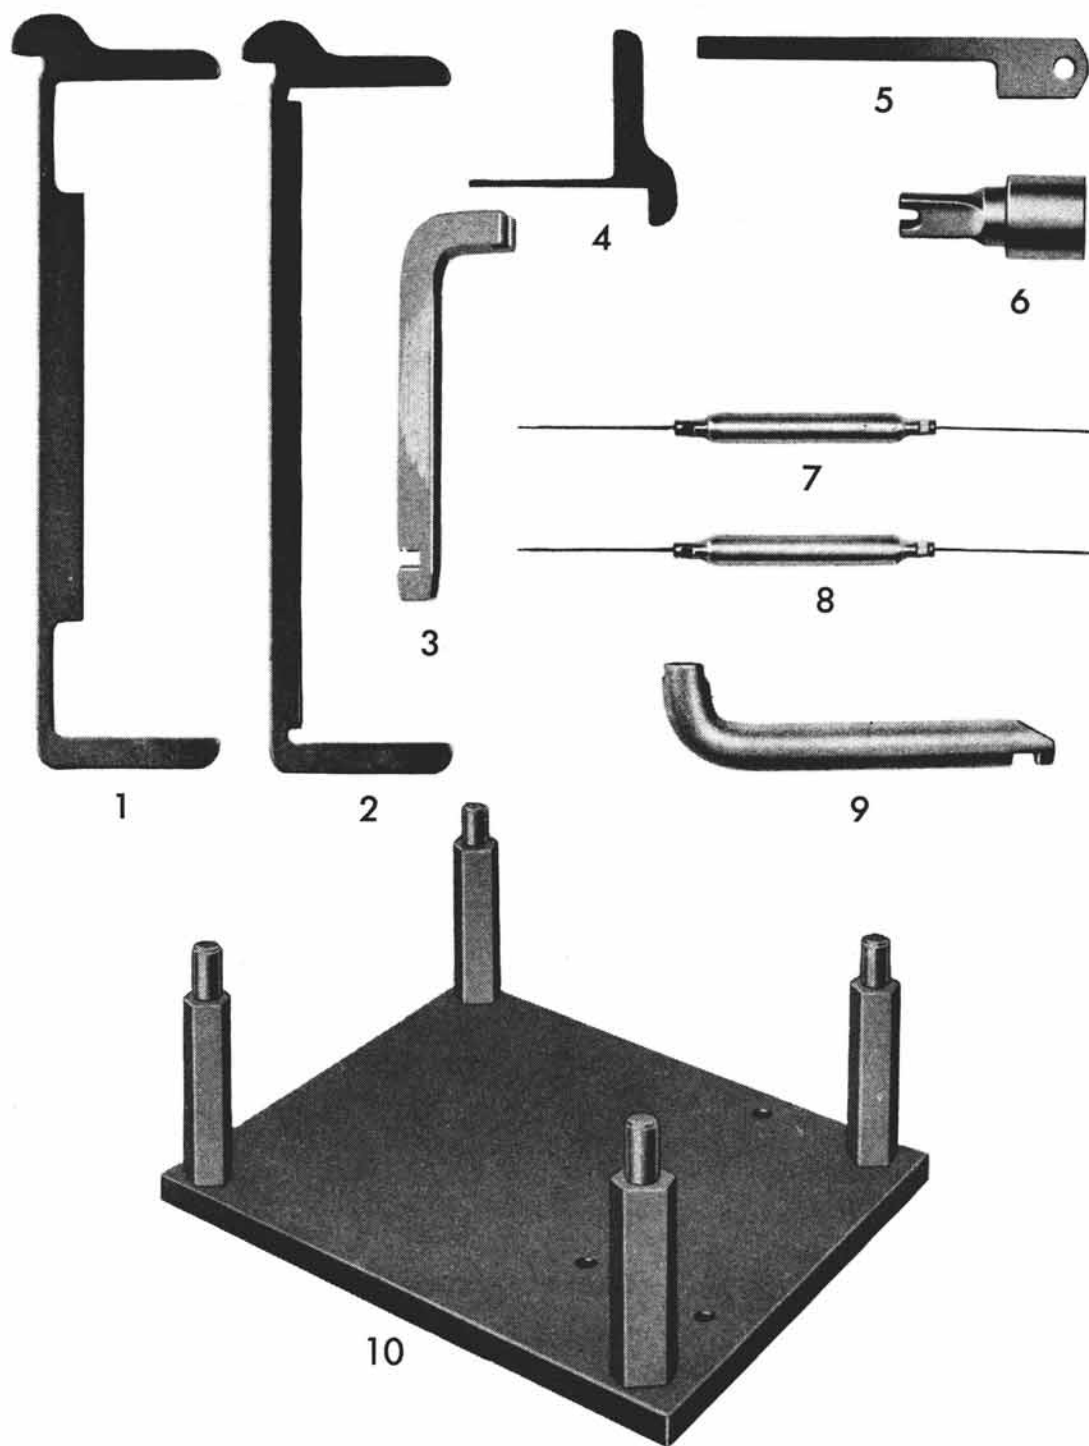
C Special Tools for Carter 4 Barrel Carburetors
